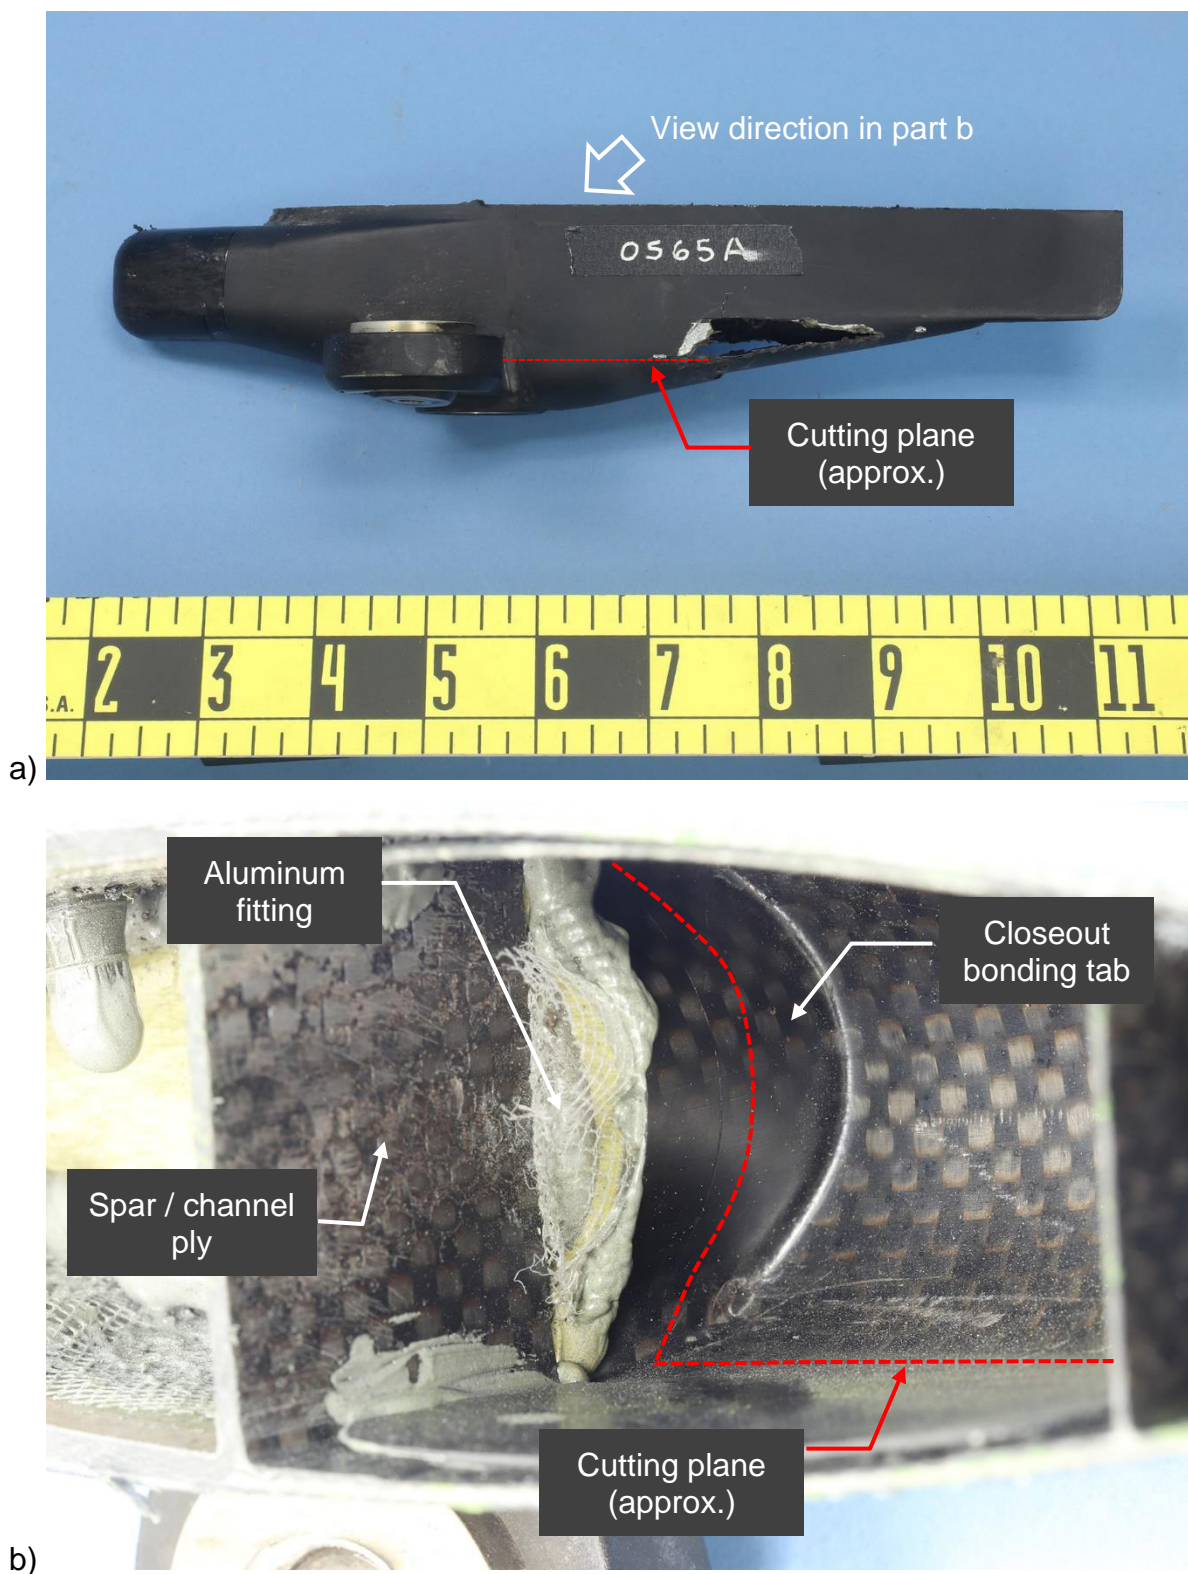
a) Sectioned inboard end of the RHR servo flap (S/N: 0565A) and b) view inside the sectioned end showing the closeout to aluminum fitting bond and the location of the cutting plane.
